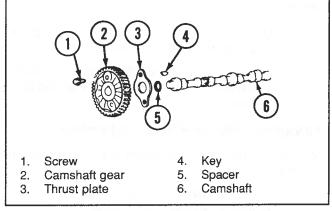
Installing Camshaft-Timing Gear And Related Parts
